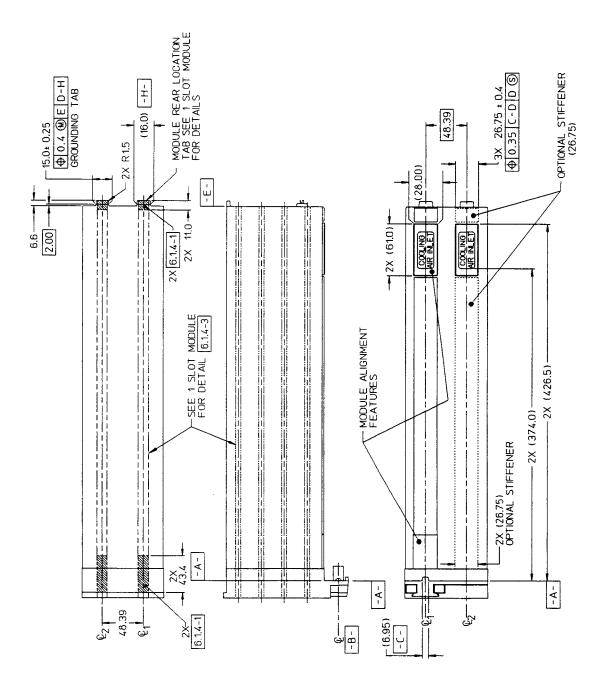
2 SLOT MODULE TOP, SIDE & BOTTOM DETAILS
